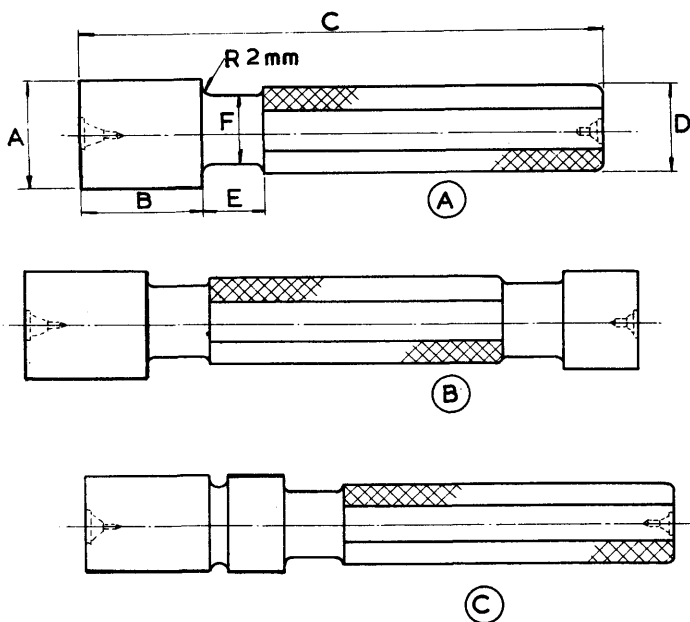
Solid-type Cylindrical Plug Gauges.
